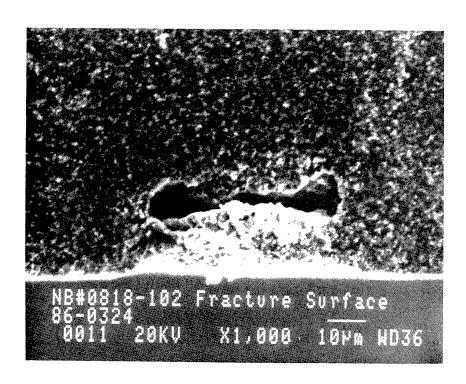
Large Pore Fracture Origin in Injection-Molded Sample
